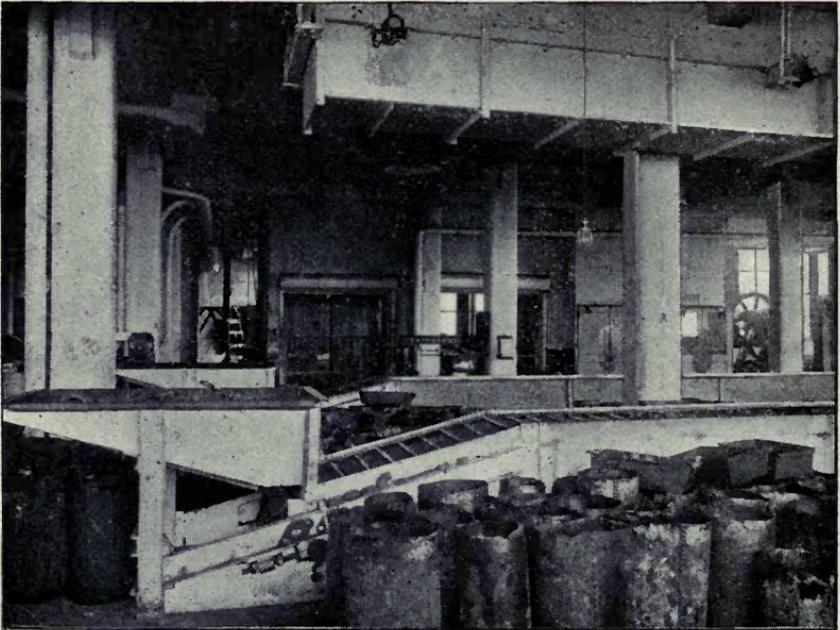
Sorting and inspecting small castings are important operations in many plants
